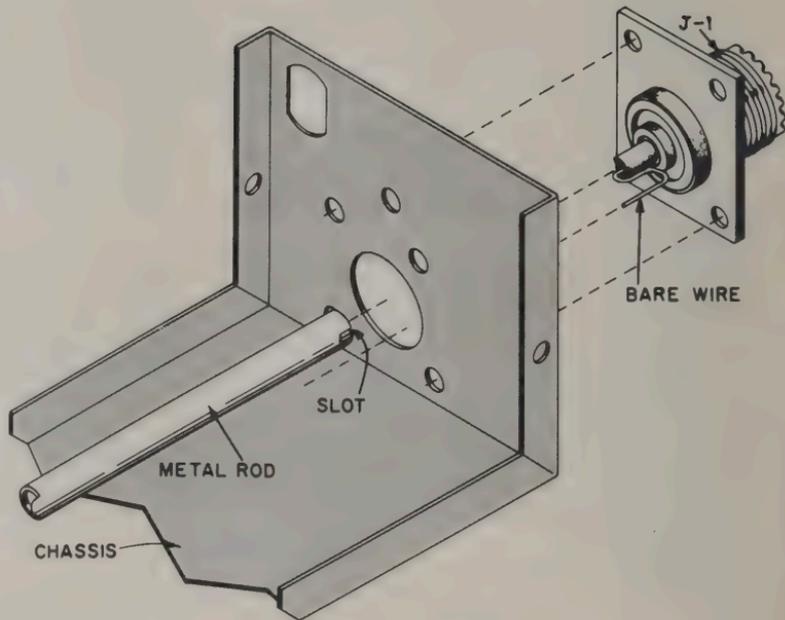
COAXIAL CONNECTOR MOUNTING
